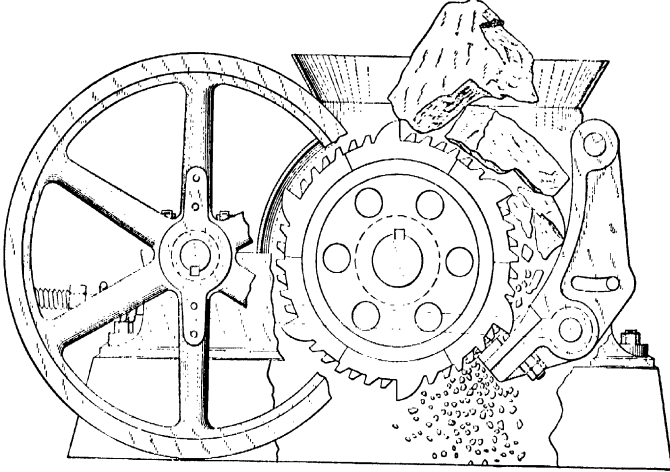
Sectional View — Single Roll Coal Crusher.
